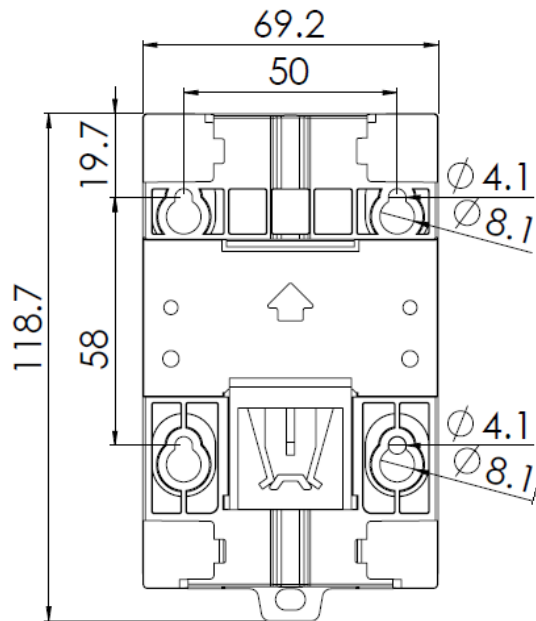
WISE-4471 Series Mounting Kit Dimensions
